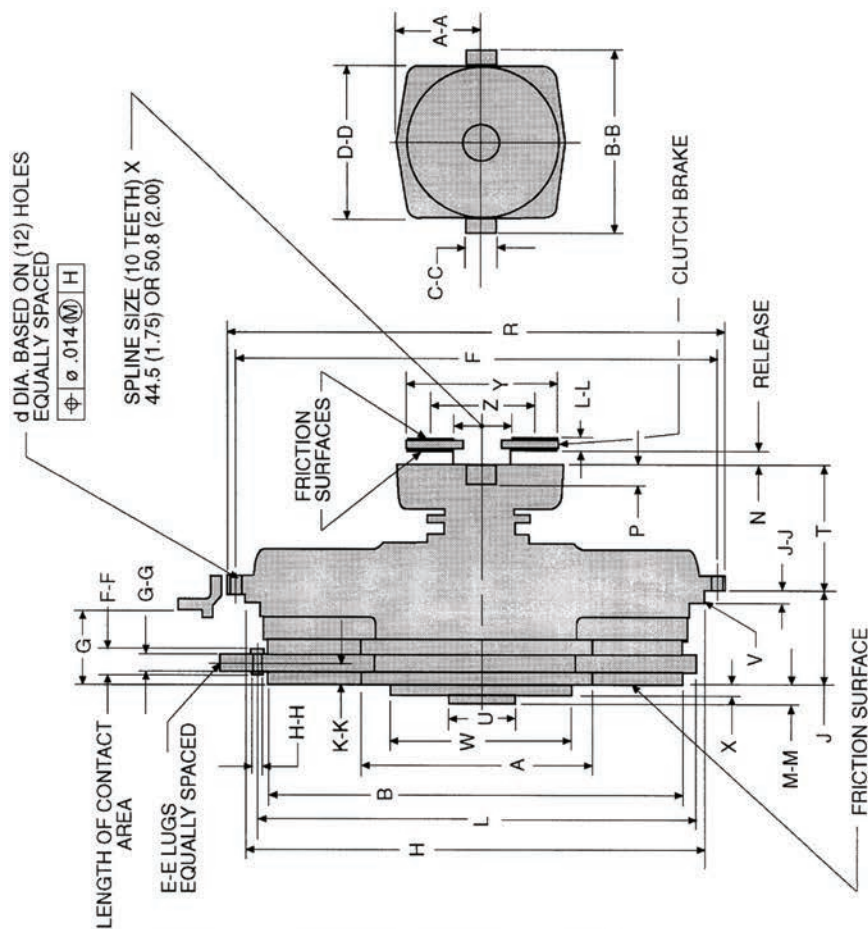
Push-type clutch (left) and clutch brake (right).
